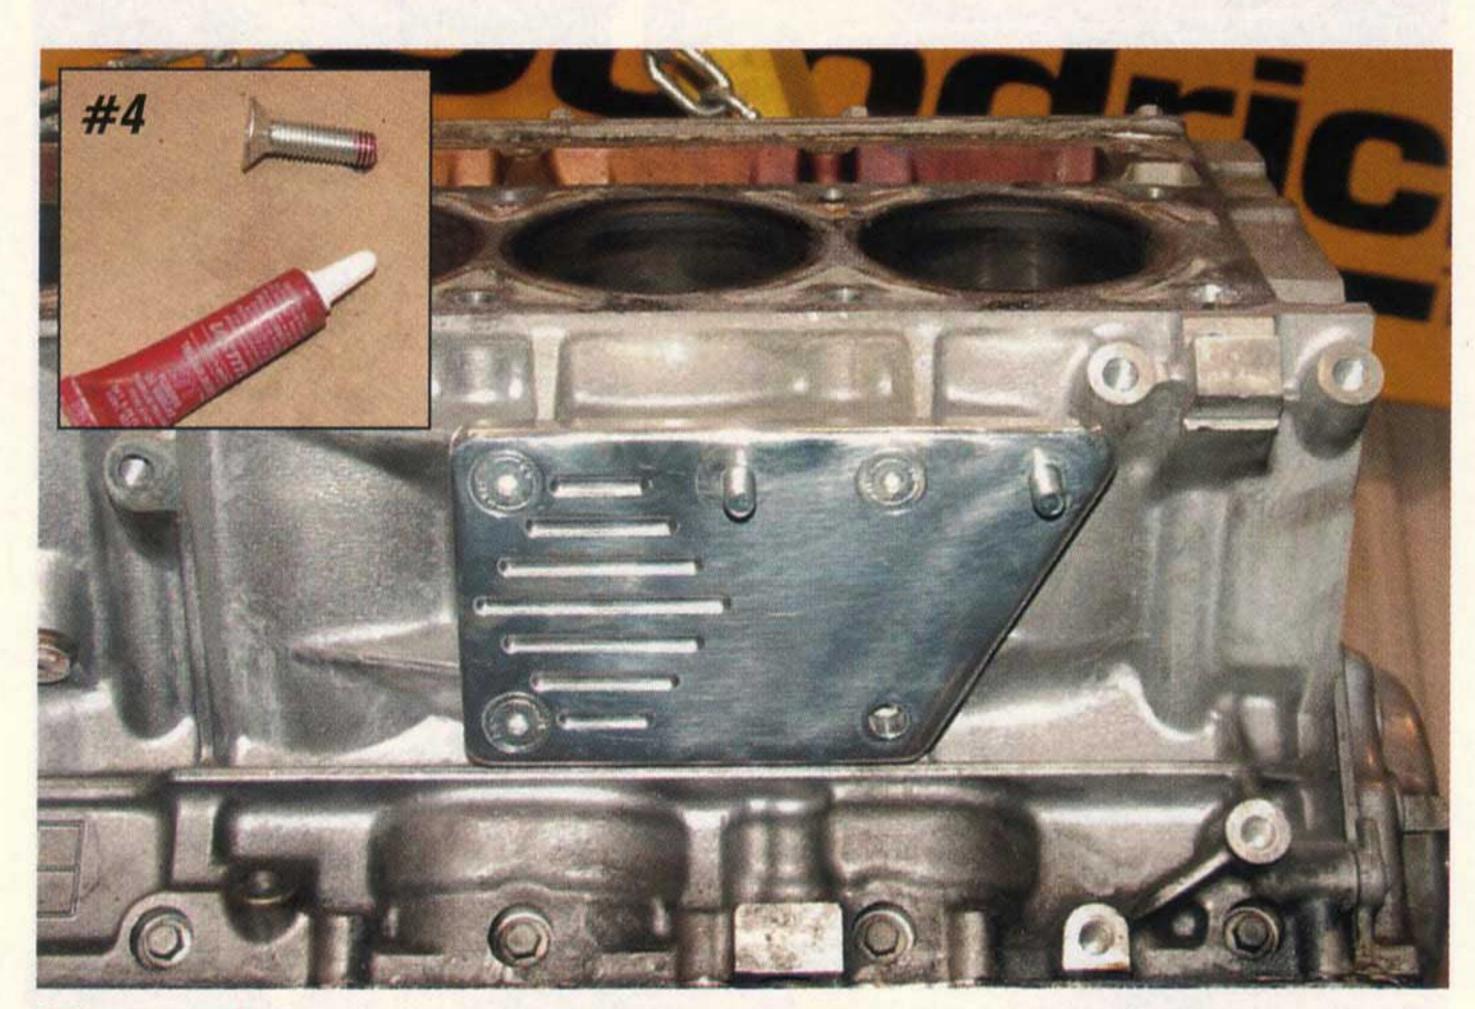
The adapter plates are held to the side of the engine block with three 8 millimeter countersunk Allen head bolts. The lower forward hole is not used. When installing the bolts use a small amount of thread locker on the threads.
